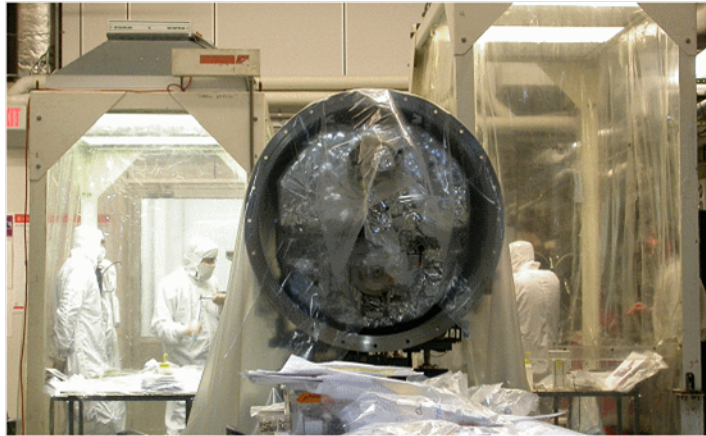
ERL injector prototype warm couplers being attached to the cold couplers through side ports on the vacuum vessel while under small portable clean rooms.
